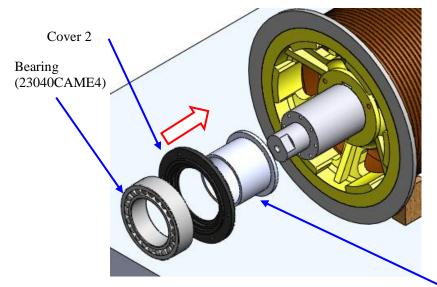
Reassemble Steel cover, Cover 2, and Bearing Steel-cover
